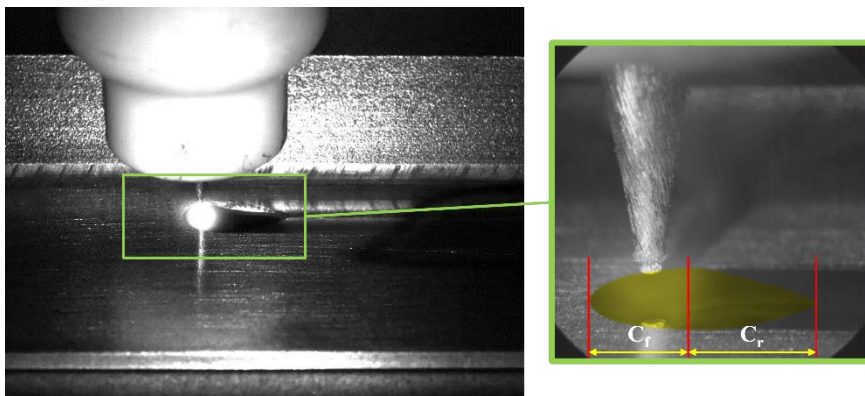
Determination of molten pool dimensions using High-Speed Videography (HSV) technique
